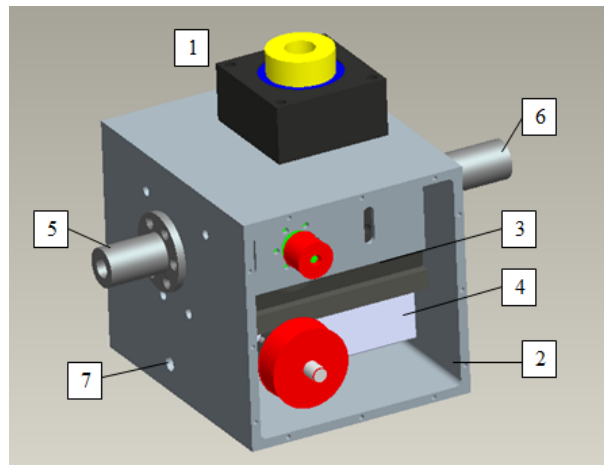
Yaw Cradle – 1. Roll Shaft hole. 2. Free side support shaft. 3. Pitch unit support bearing. 4. Bearing holder, 5. Yaw locking bolt, 6. Yaw motor, 7. Yaw Motor Encoder, 8. Yaw pulley and belt, 9. Yaw Gearbox. Green – Motor, Red – Pulley, Blue – Bearings, Yellow – Shaft clamp
